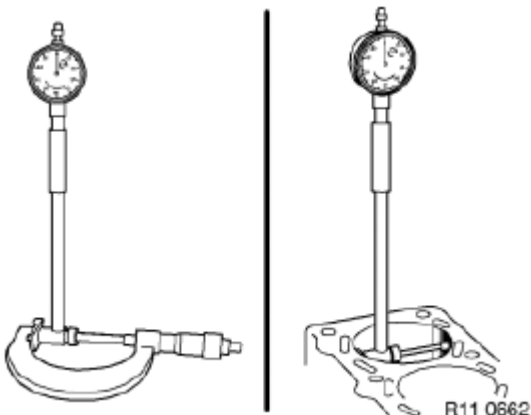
Measuring Bottom, Centre And Top Of Cylinder Bore In Direction Of Travel And Direction Of Engine Rotation
